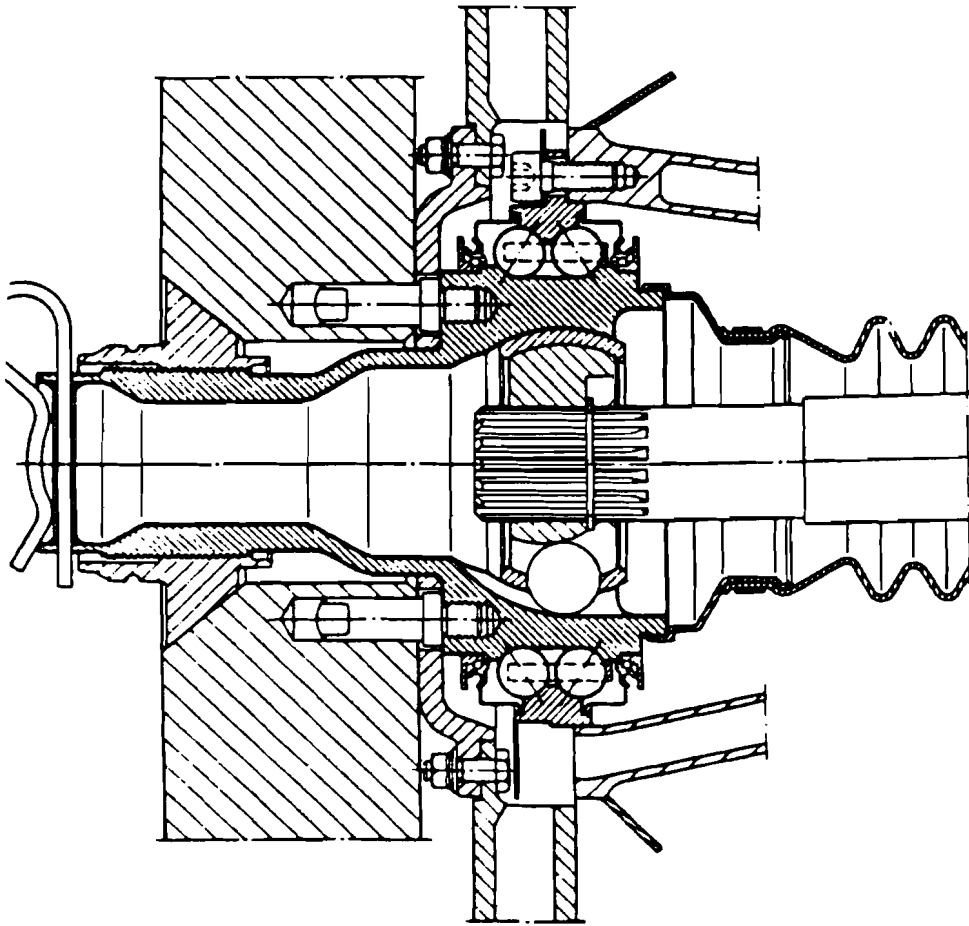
Bearing arrangement for Front-wheel drives using Hub Unit 1. (Repr. from SKF, 1982)
